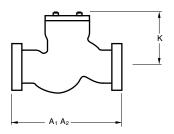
WE* Butt Weld Ends Fig. No. 58615-7 Flanged, Raised Face Fig. No. 58615-7-RJ Flanged, Ring Joint
